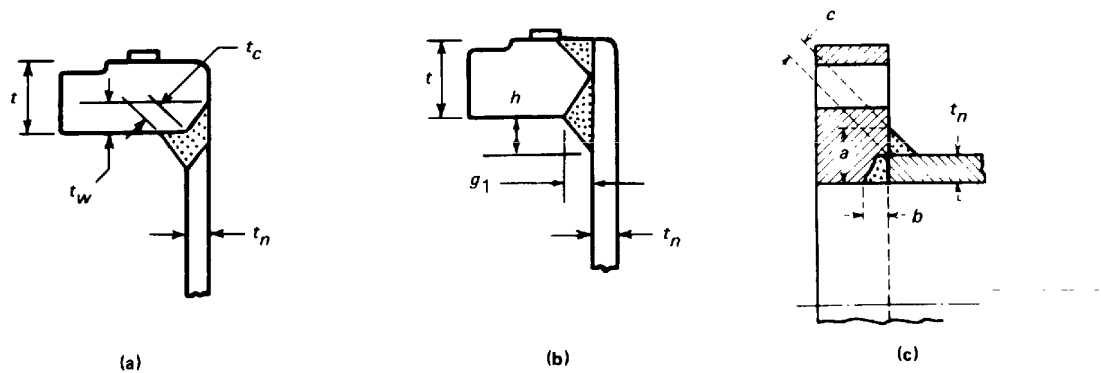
ACCEPTABLE FULL PENETRATION WELD DETAILS FOR CATEGORY C JOINTS
